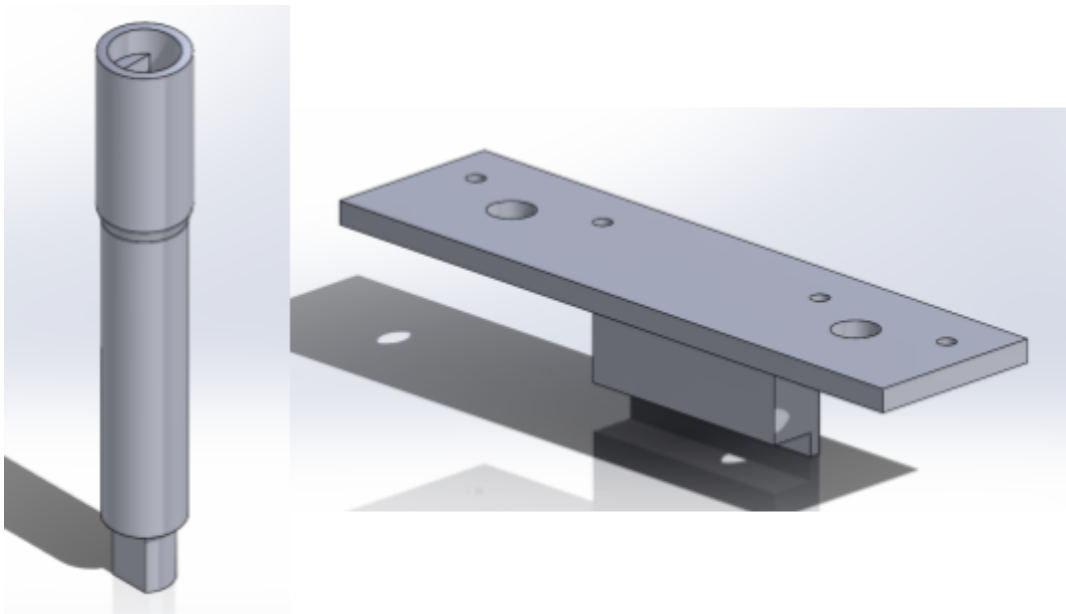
CAD Models of Knob (Left) and Motor Holder (Right)
